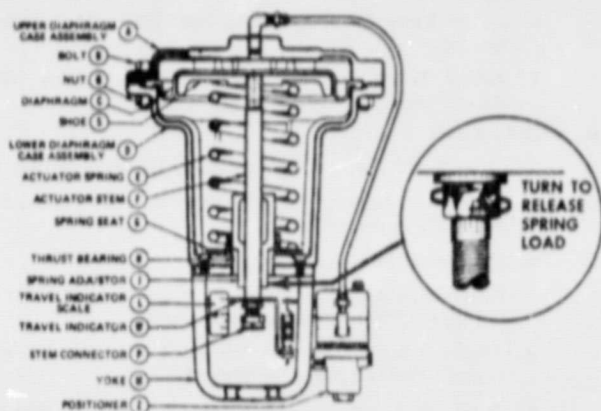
30 SQ. INCH DA ACTUATOR. ACTUATOR FOR VALVE SIZES 1-1/2" THRU 2" SHOWN. FOR SIZES 1-1/2" THRU 4" THIS ACTUATOR HAS SPLIT NUT CONNECTOR.
